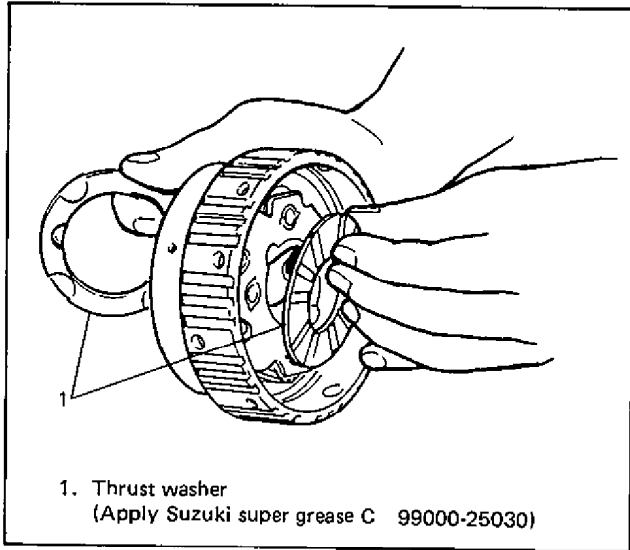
B-196 Installing Rear Planetary Thrust Washers
